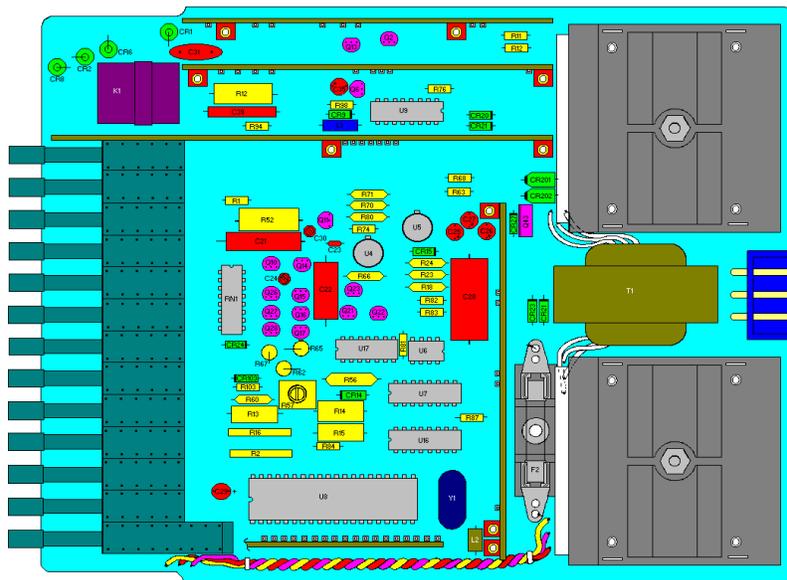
UUT Layout Drawing Screen (C:\TESTER\LAYOUT.PCX)
